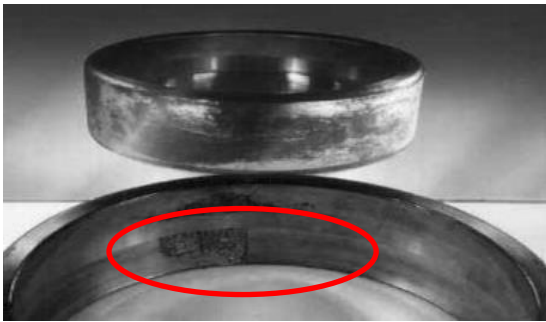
Flaking in the raceways of the outer ring of a spherical roller bearing caused due to corrosion (Courtesy : Precision Bearings Pvt. Ltd.)
